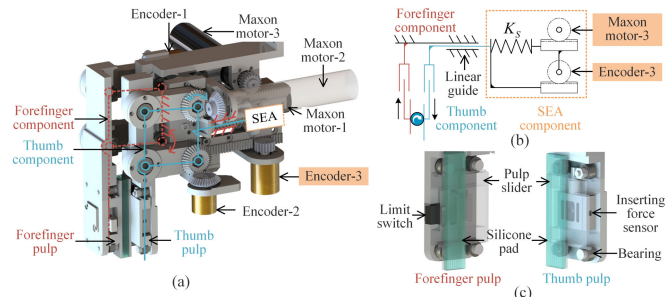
Guidewire manipulator. (a) Detailed assembly. (b) Mechanism schematic. (c) Finger pulp mechanism.
